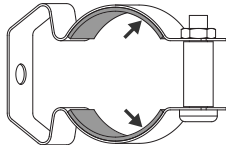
Optional Mounting Hardware with Anti-Rotation Pads
